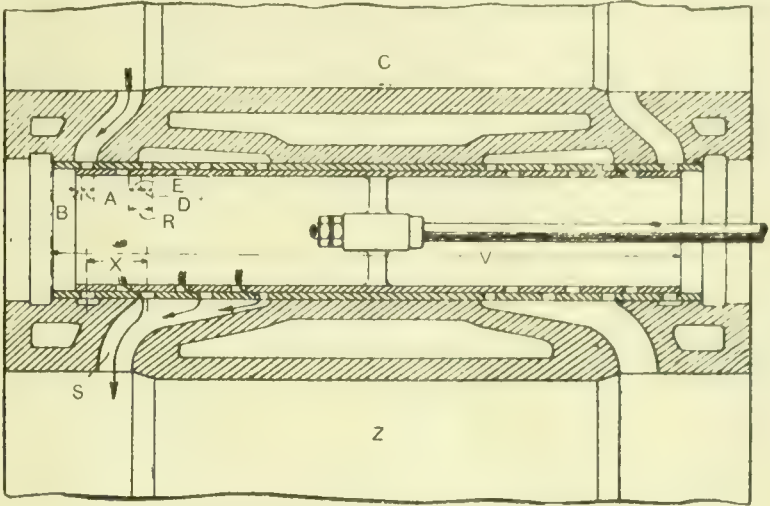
VALVE FOR MULTI-CYLINDER STEAM ENGINES.
